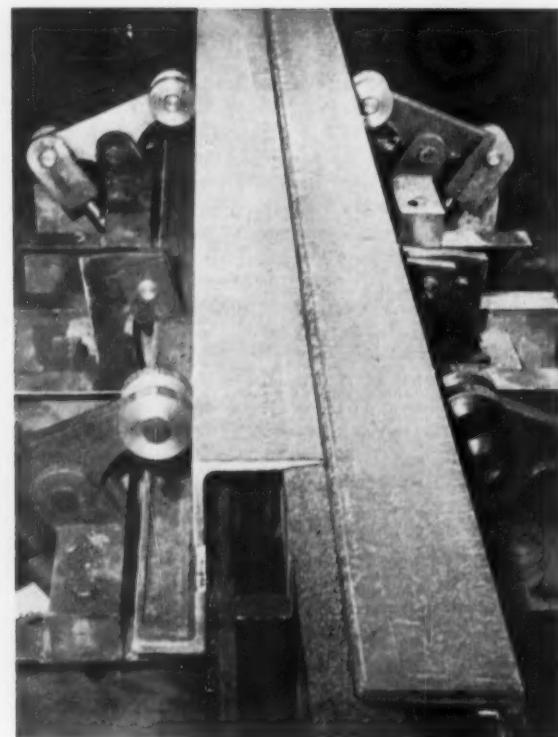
Welding flux is pressed against the bottom of the weld as shown.
